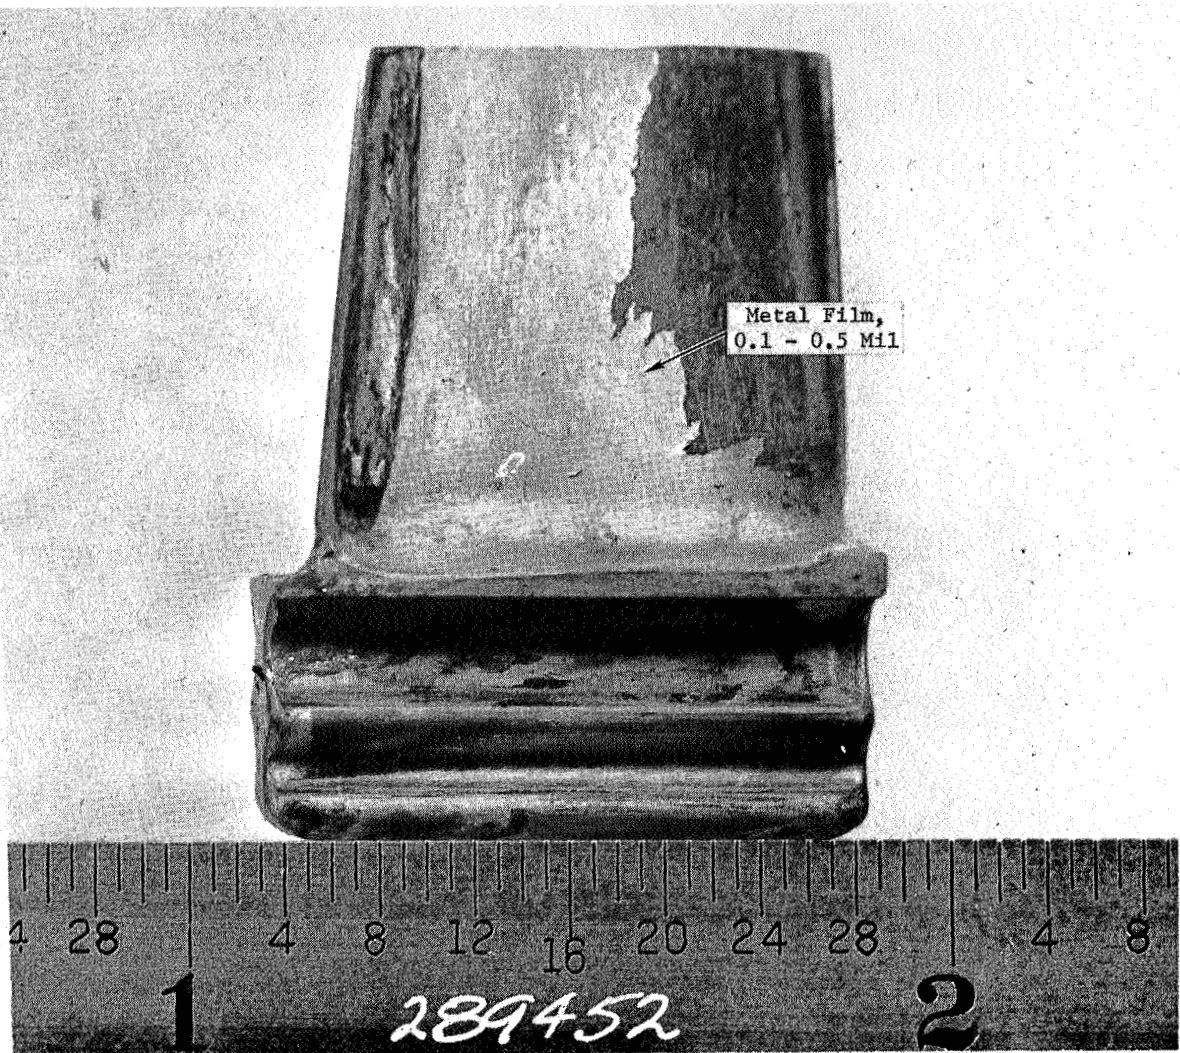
First Stage U-700 Blade After 2000 Hour Test Showing Deposited Metal Film. (289452)
